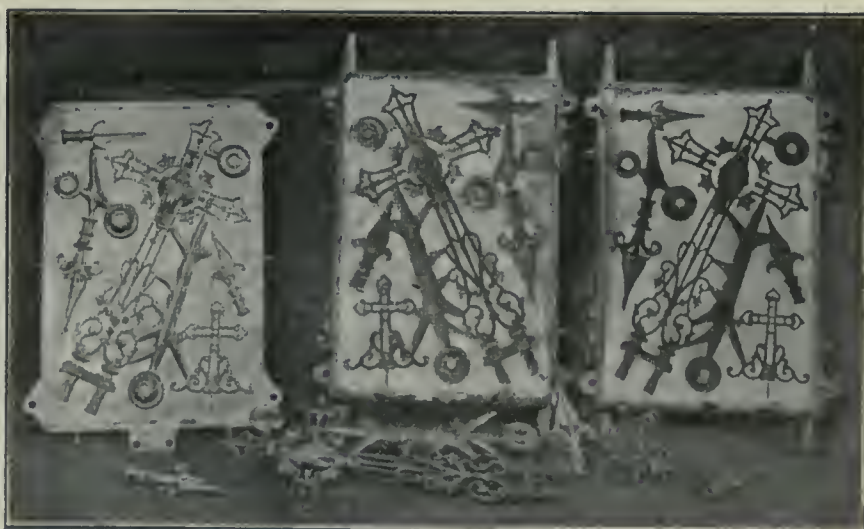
EXAMPLE OF WORK PRODUCED BY MACHINE.
